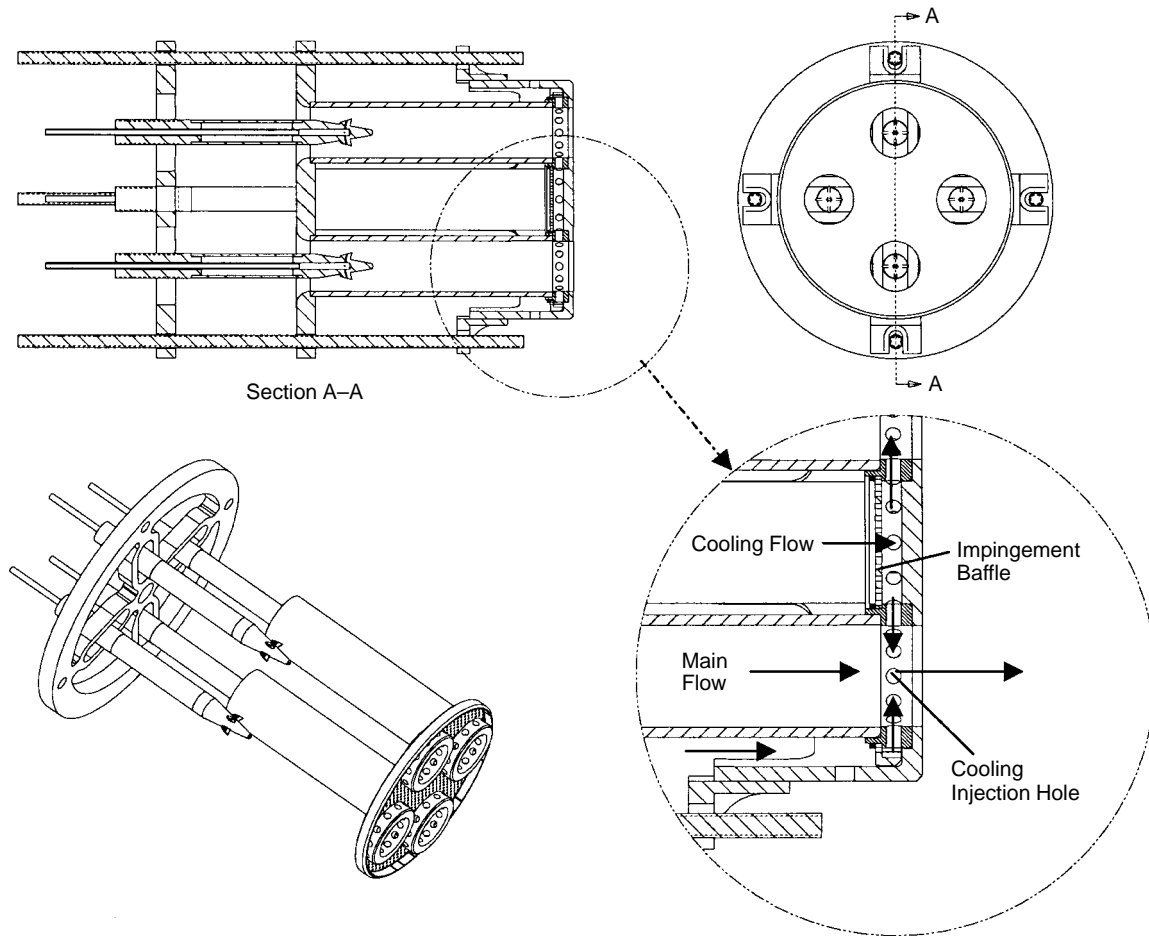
Full-Scale, One-Inch IMFH Tube Assembly Cross Section
